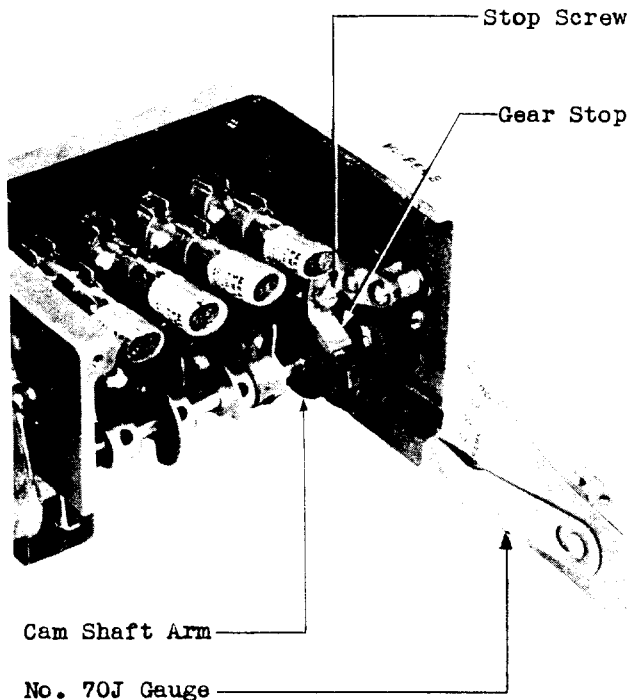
Checking Cam Shaft Gear Retractable Spring Tension
